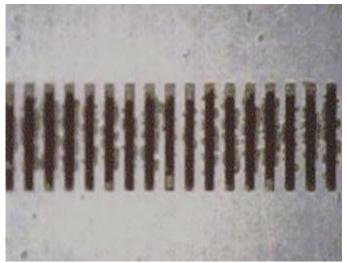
Solder paste 'bleeding' at the bottom of the stencil.
